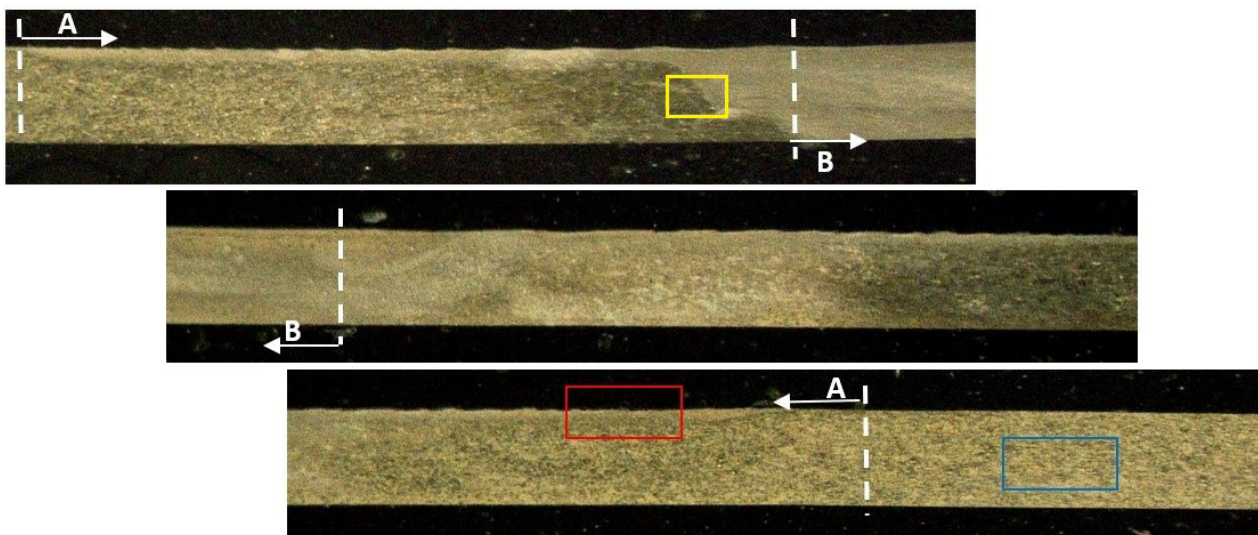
Macro structure of the FSW weld – width from face side (A-A), from the ridge side (B-B), etched state
